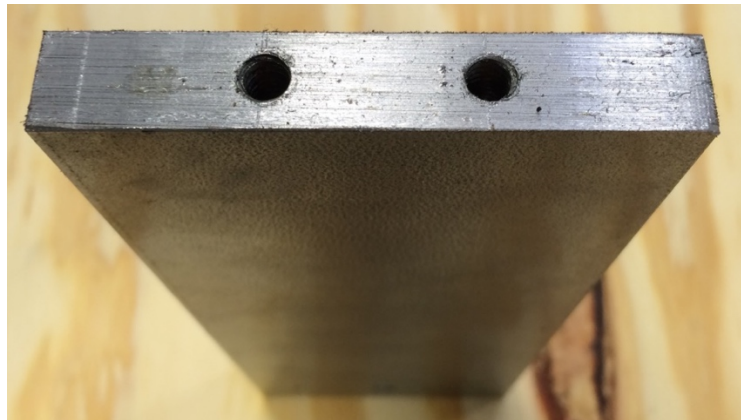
Two Threaded Holes in Bottom of Prototype Side Brackets
